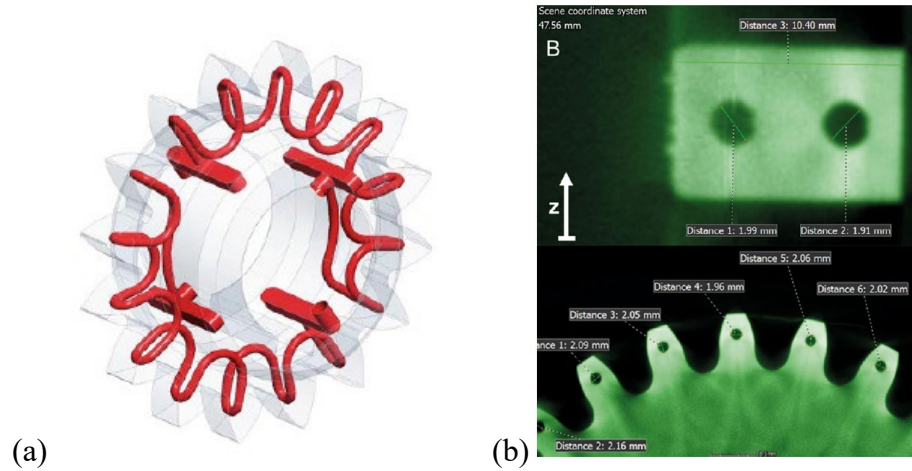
Gear with serial flow internal cooling channels: (a) illustration of the channel path and (b) CT scan of gear tooth cross section.³³
